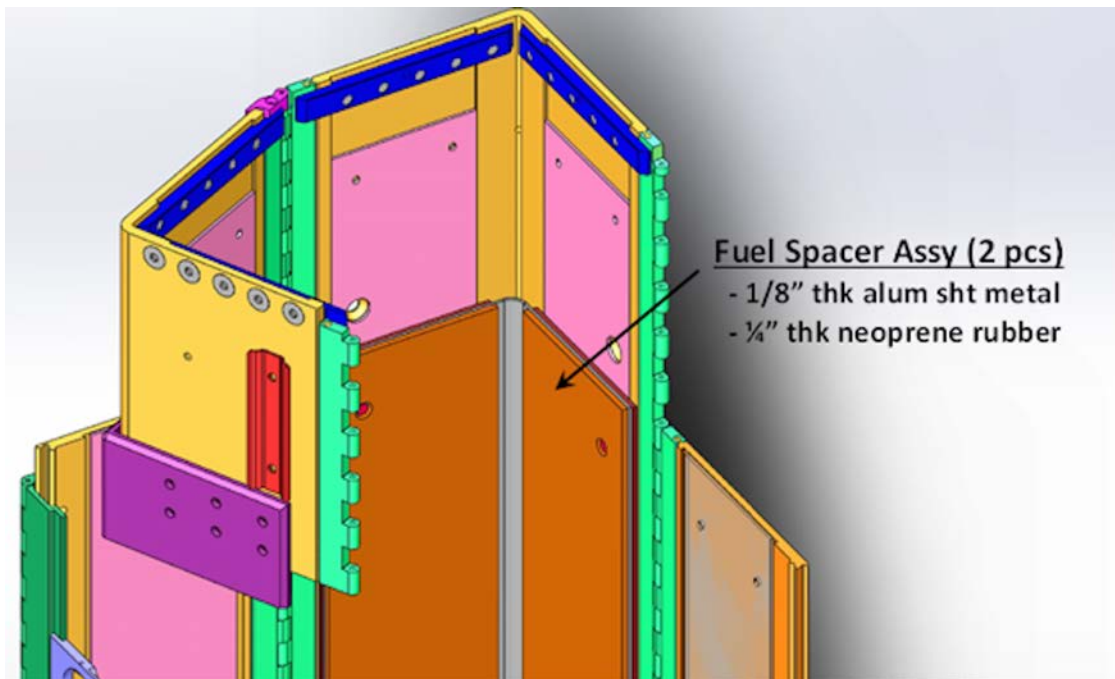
XL Clamshell Fuel Spacer Assembly
